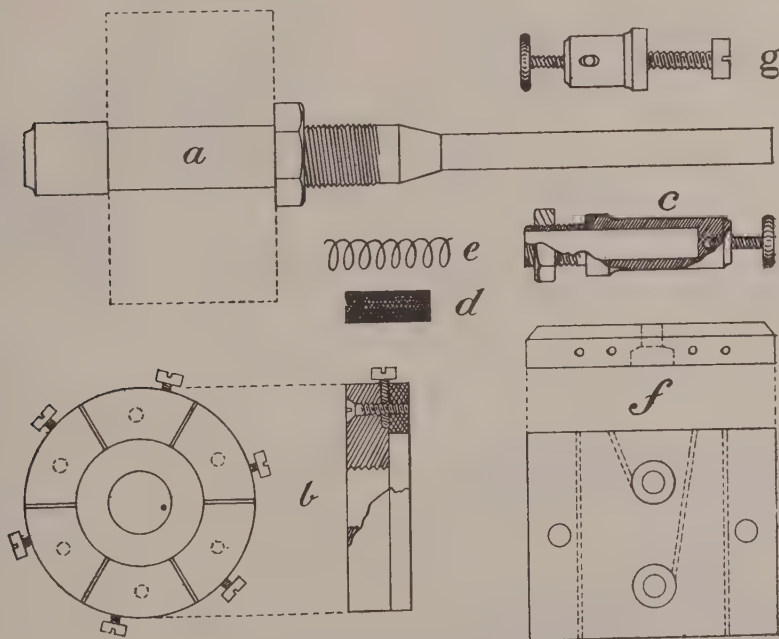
DETAILS OF COMMUTATOR, SHAFT, &c.
